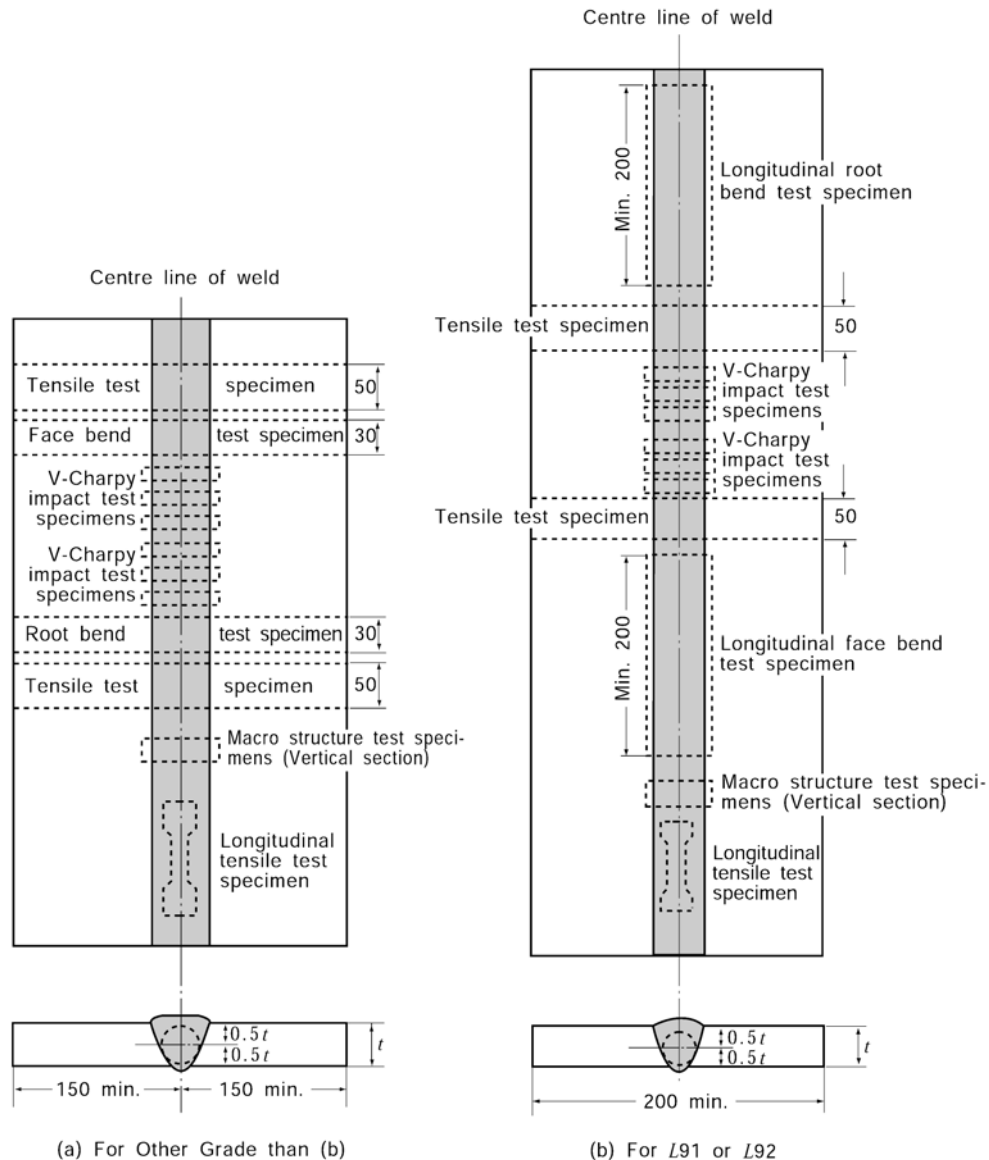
Butt Weld Test Assembly with One-run and Multi-run Technique (Unit : mm, t = Plate thickness)
